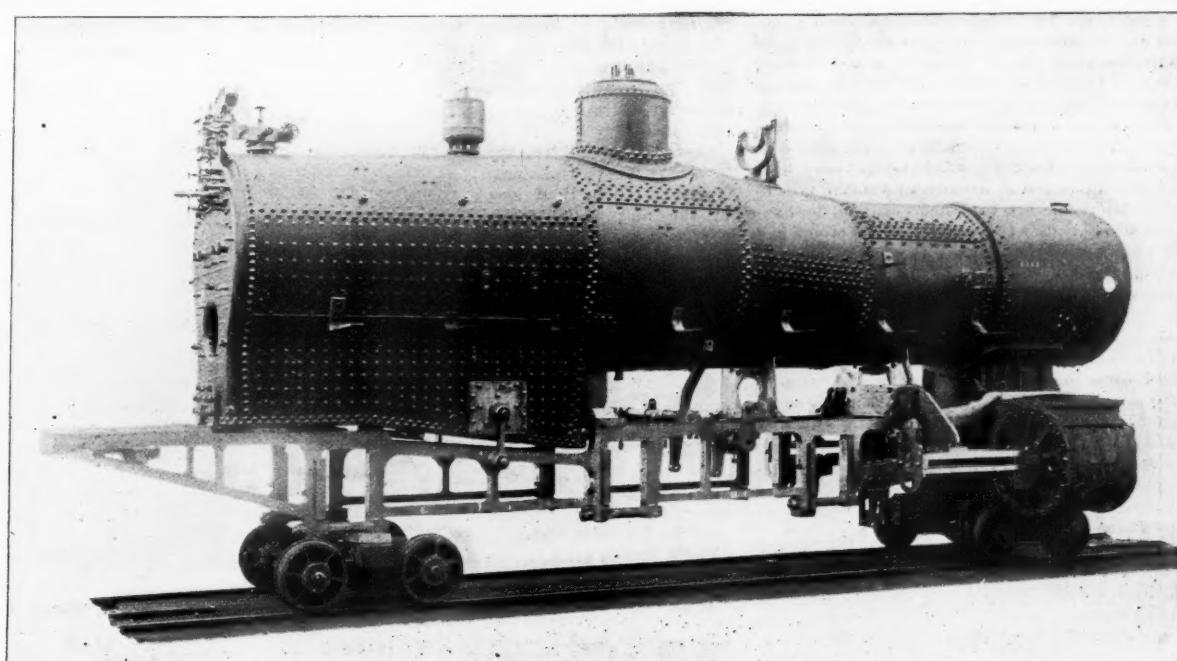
Boiler and Frame of Northern Pacific, Schenectady, Ten-Wheel Compound Passenger Locomotive.
